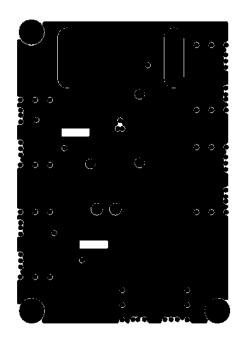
MAX3724/MAX3725 EV Kit PC Board Layout—Power Plane
